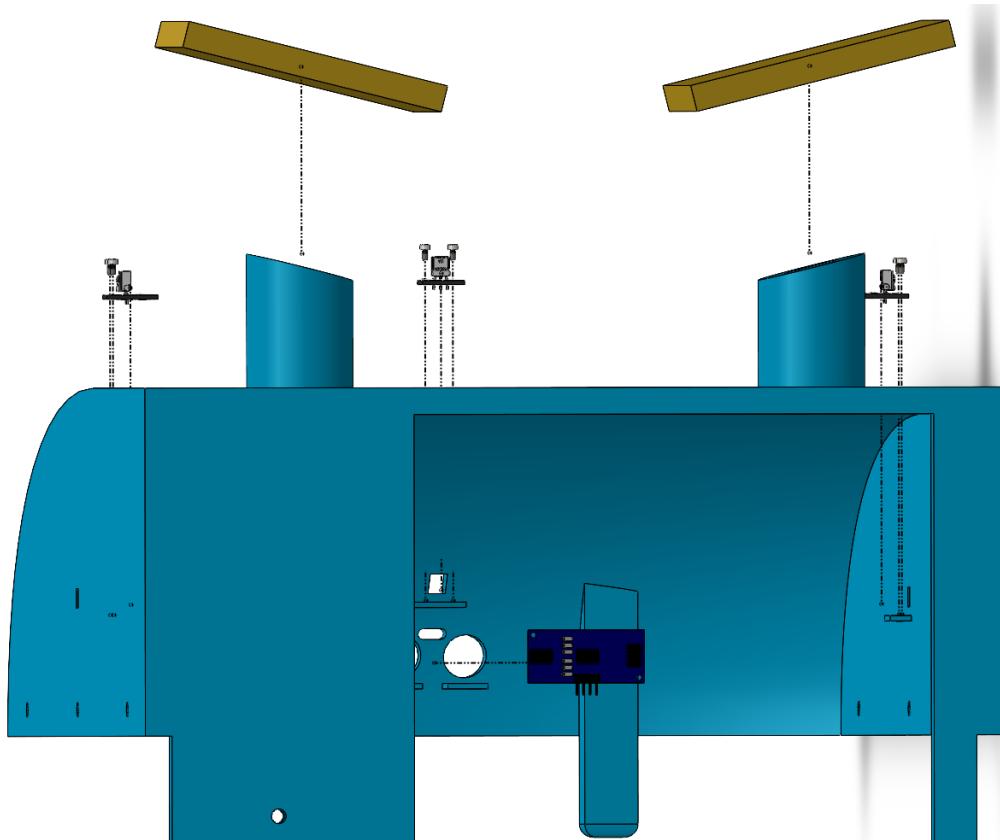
Assembly of housing with IR Sensors and an Ultrasonic Sensor
